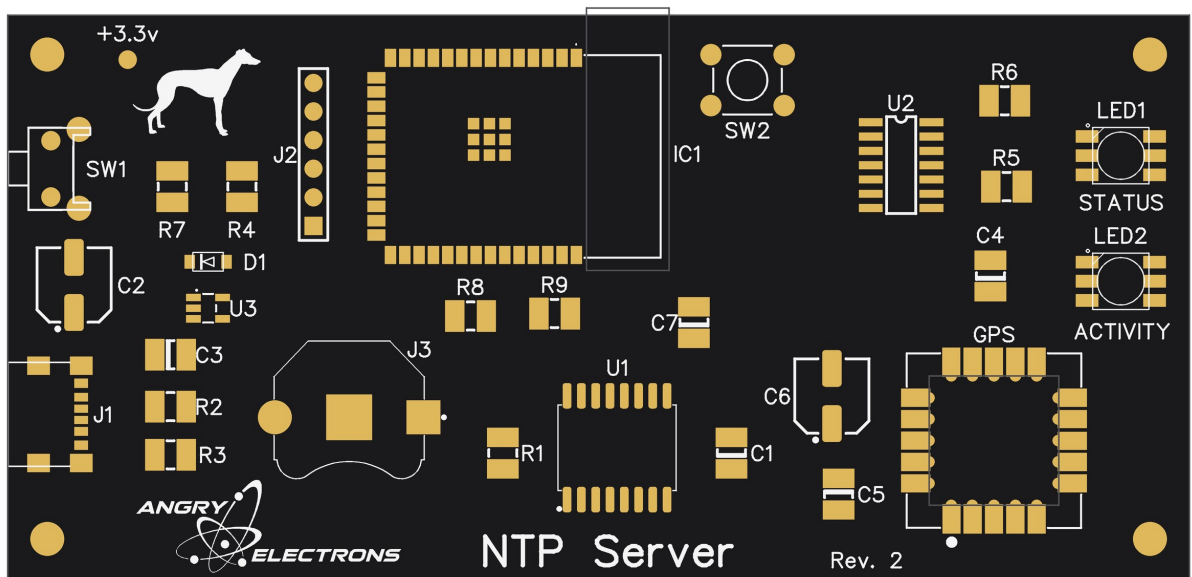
Top-side component placement (Rev. 2 silkscreen). IC1 is the ESP32-S3 module; the GPS receiver is at the lower right.
